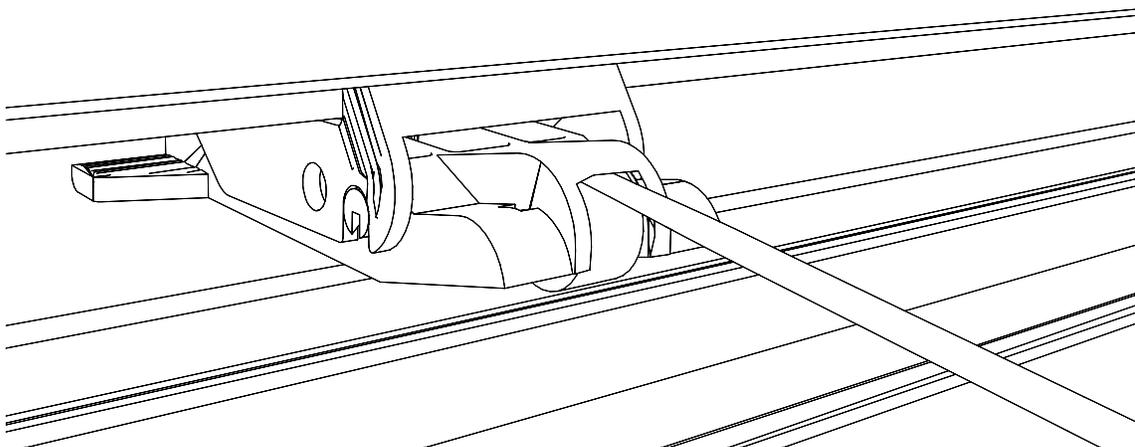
Placement of the flat head screwdriver on the wheel for removal.
